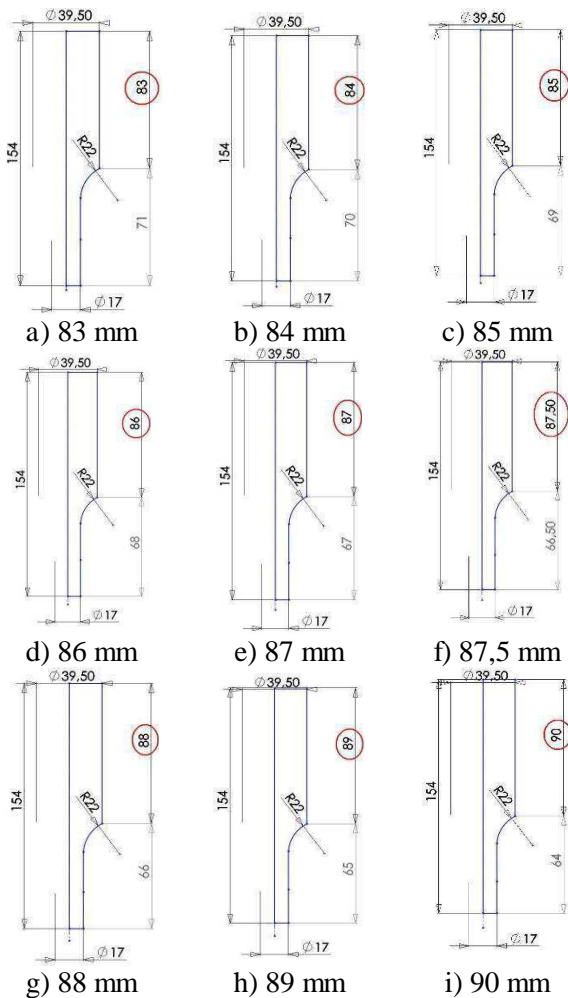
The dimensions for the upper cylindrical part of the Titanium ultrasonic horn
